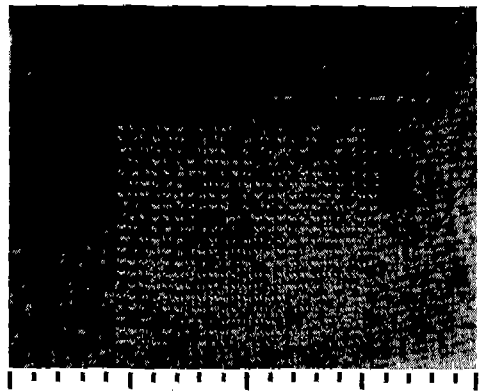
Cutting example and micro drill (drill 0.2 φ, stainless steel)
